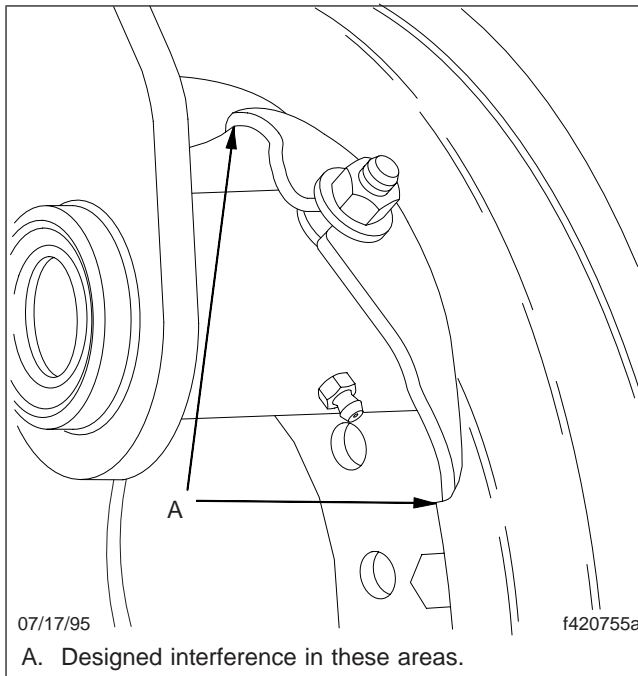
, Check the Fit at the Upper Dust Shield-to-Brake Chamber Bracket
